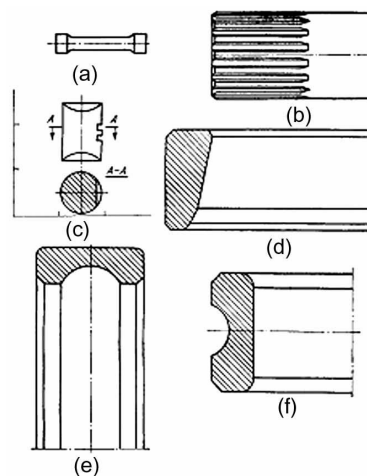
Shapes of the specimens studied: (a) specimen for break test; (b) slot specimen of a half-axle of KRAZ automobile; (c) split key; (d), (e), and (f) bearing rings.
